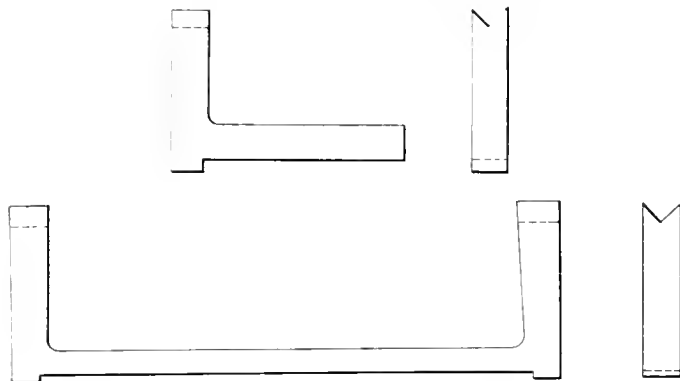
Method of Repairing Frame Breaks in the Lower Bar Near Pedestal.
